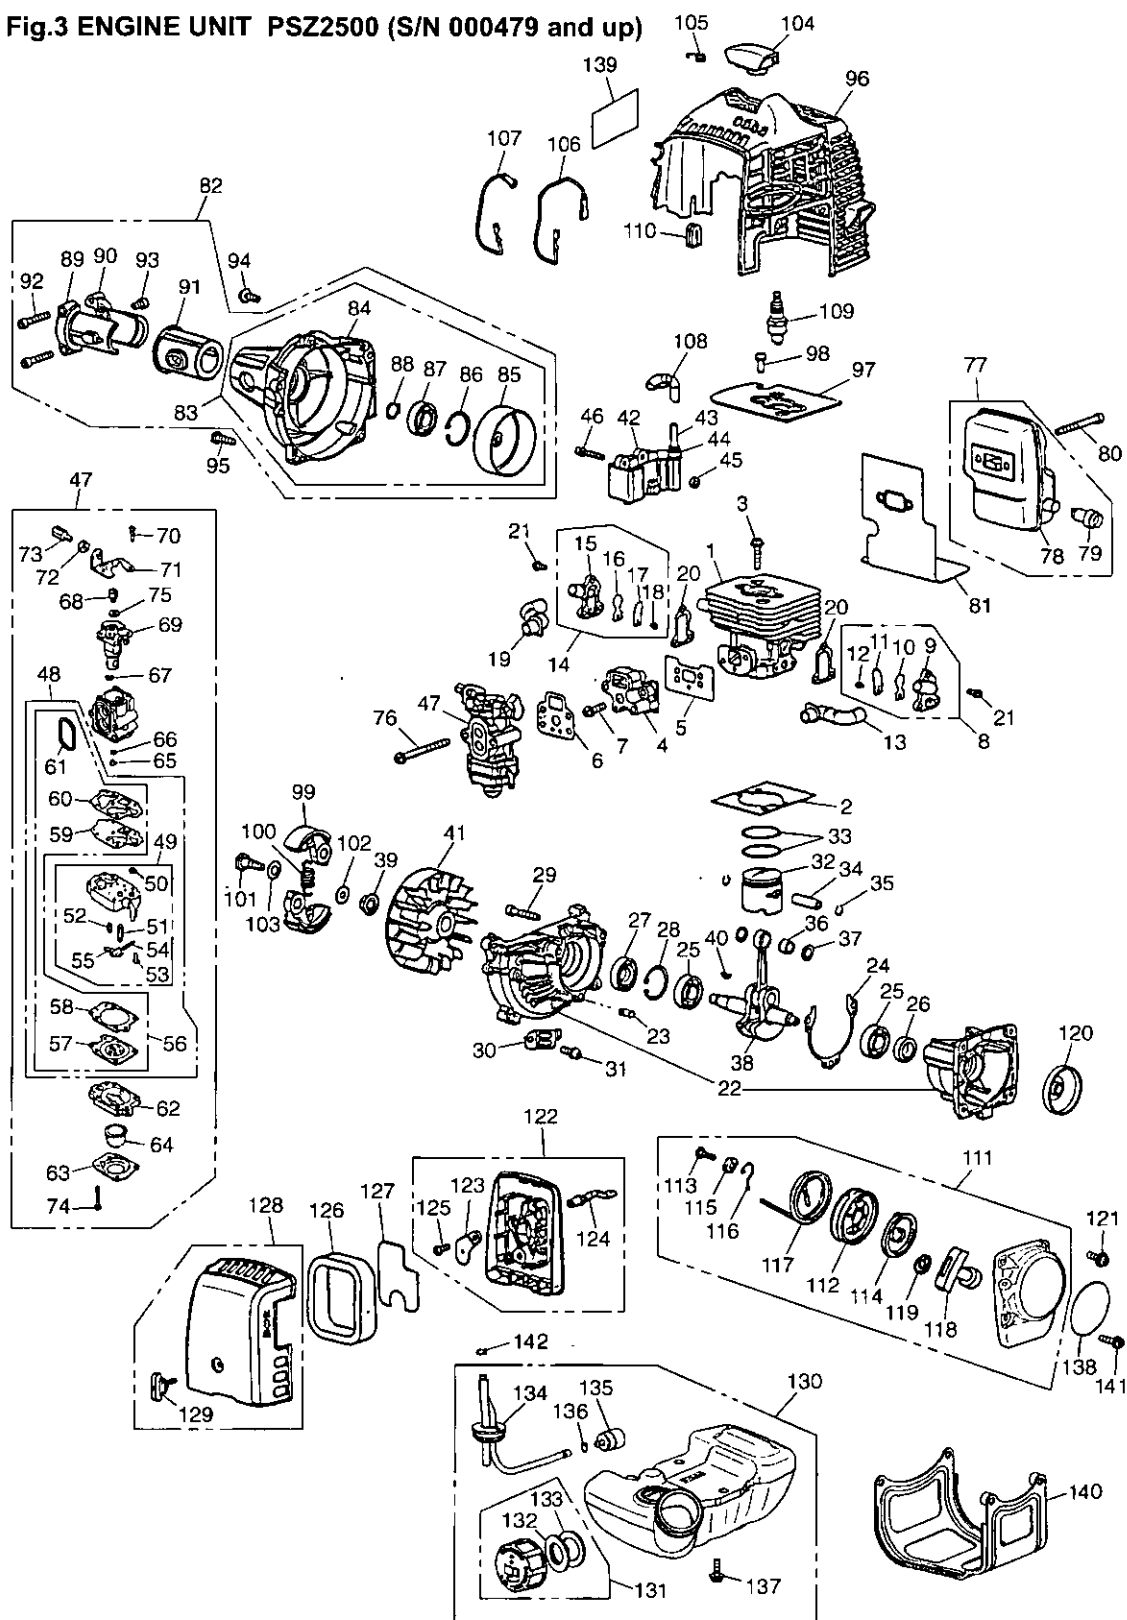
ENGINE UNIT PSZ2500 (S/N 000479 and up)
